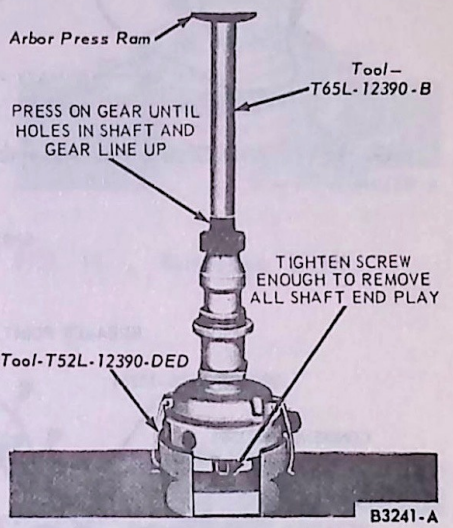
Installing Original Shaft and Gear—6-Cylinder Engine
